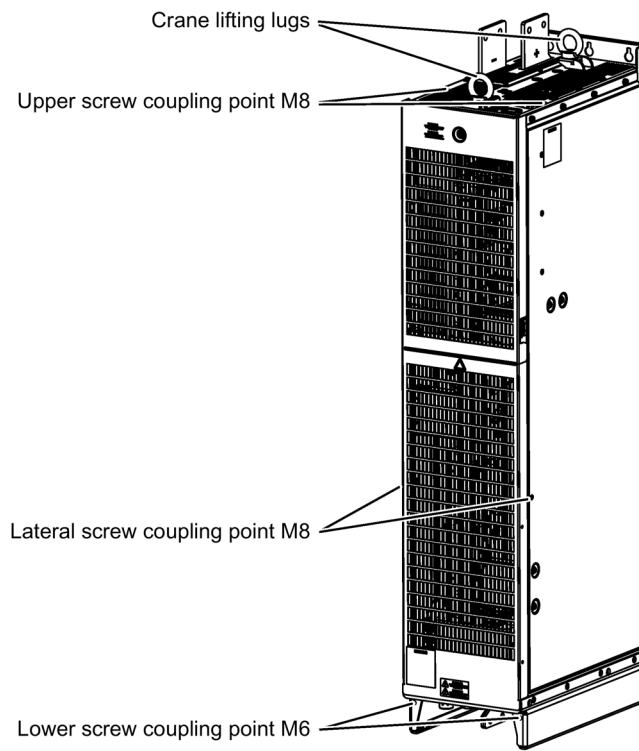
Crane lifting lugs / screw coupling points for mechanical support
